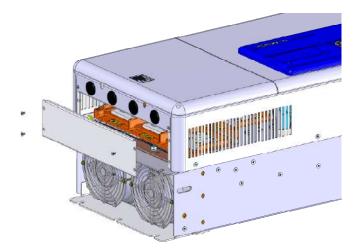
Removal of the bottom plate, to access the power terminals
